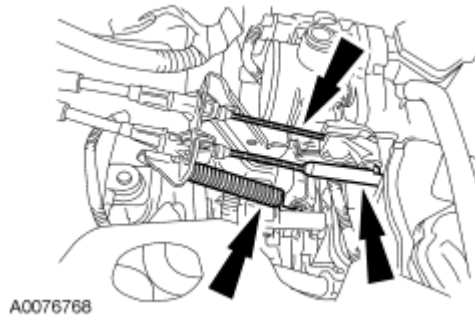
Locating Accelerator Cable, Speed Control Actuator Cable & Throttle Return Spring
